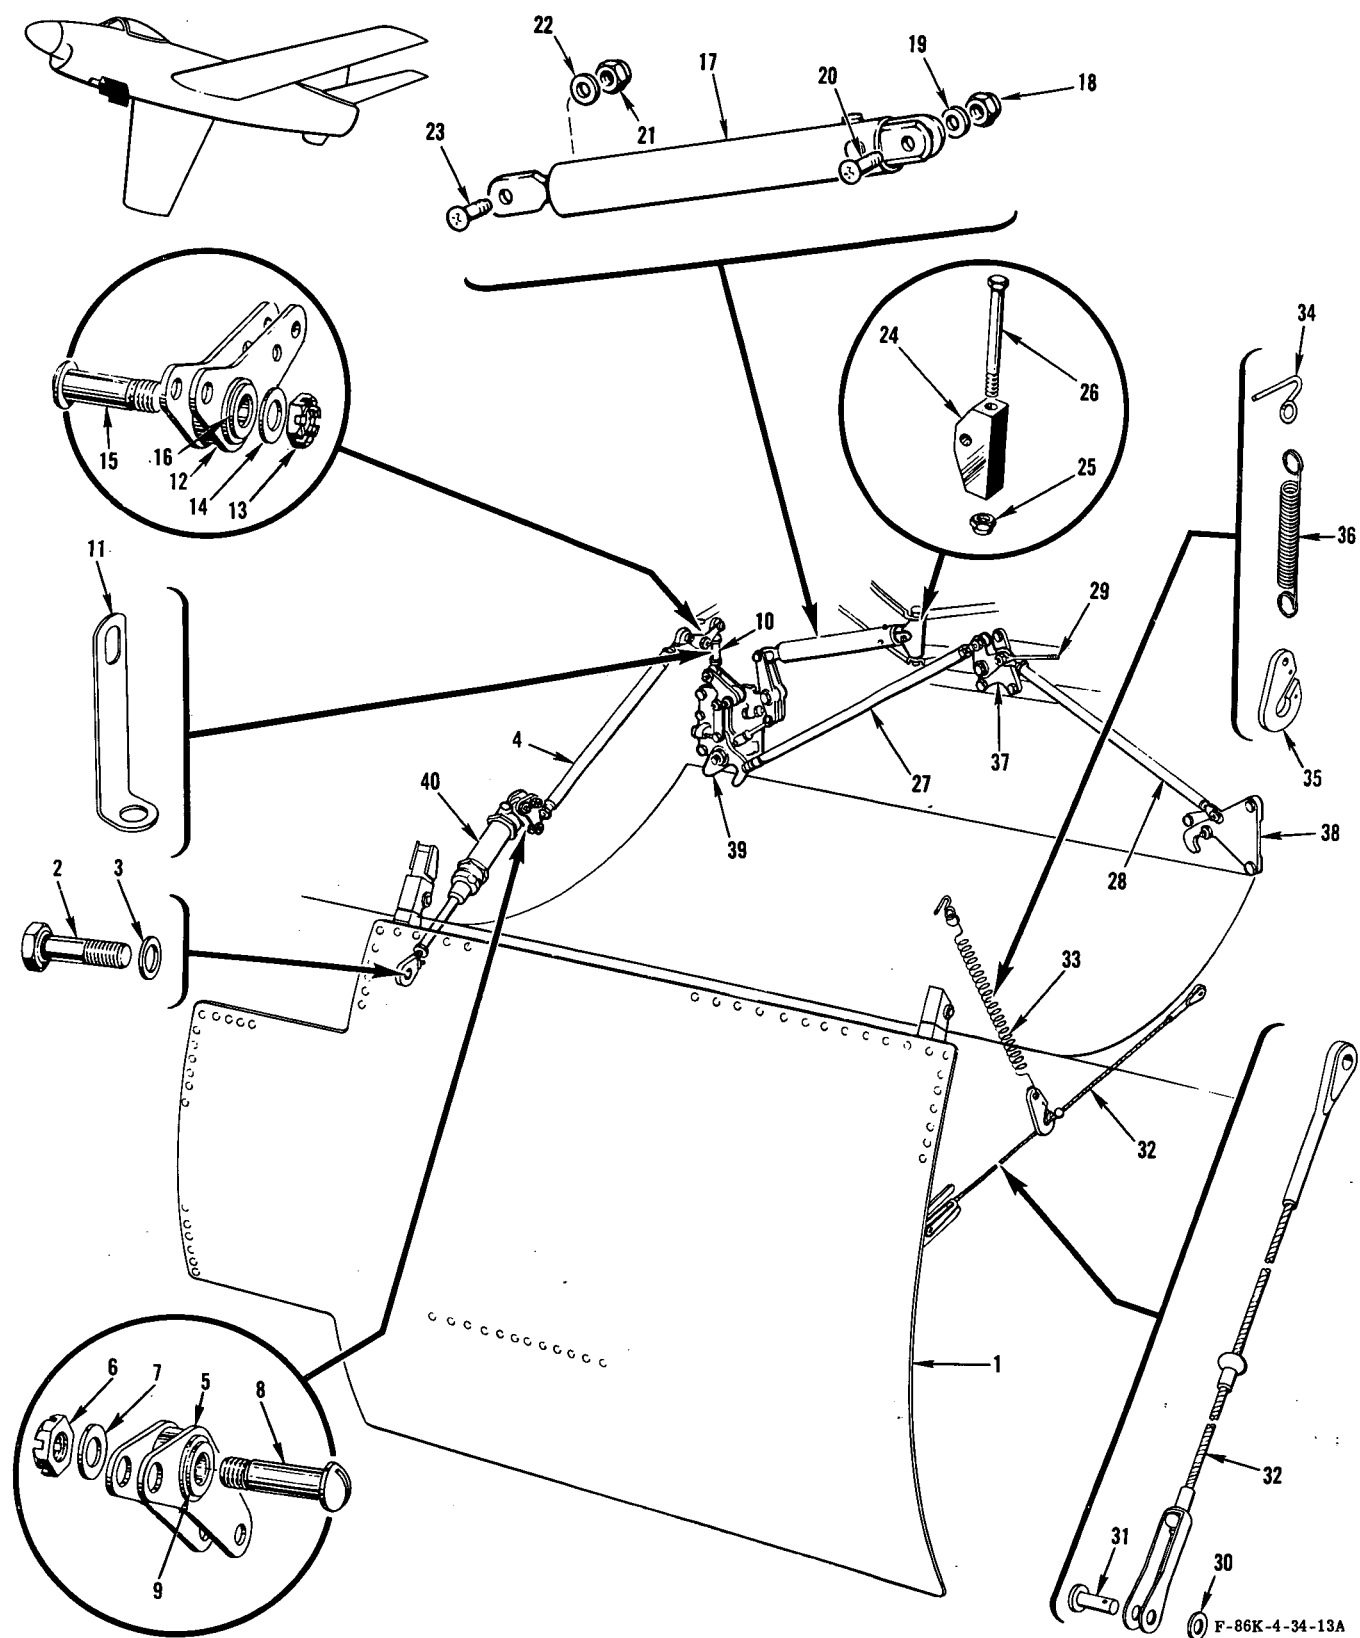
AUXILIARY ALIGHTING GEAR WHEEL DOOR INSTALLATION
